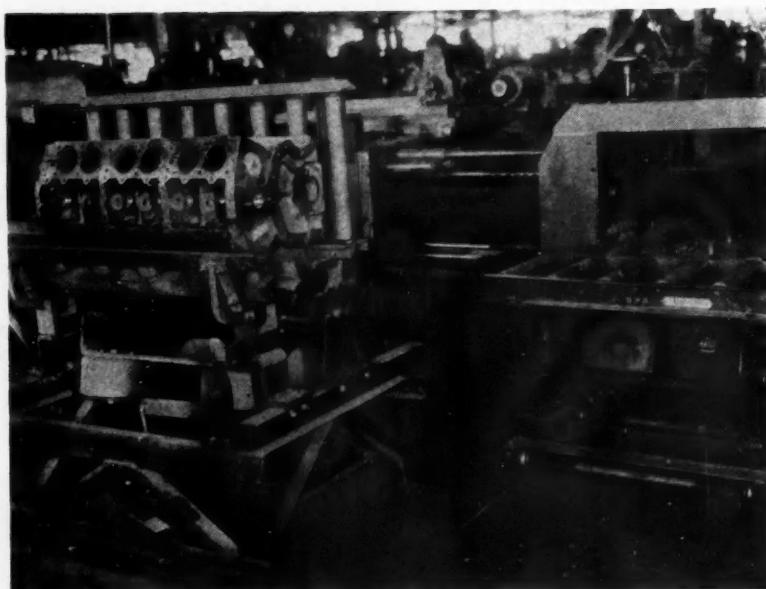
Here is the method of transferring the block from a Cincinnati miller to the Natco which drills the rocker arm shaft bearings. Comes out on its side, is turned upright, and wheeled over to the driller on the carriage
